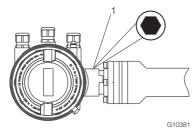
Rotating the transmitter housing 1 Fixing screw | 2 Transmitter housing
